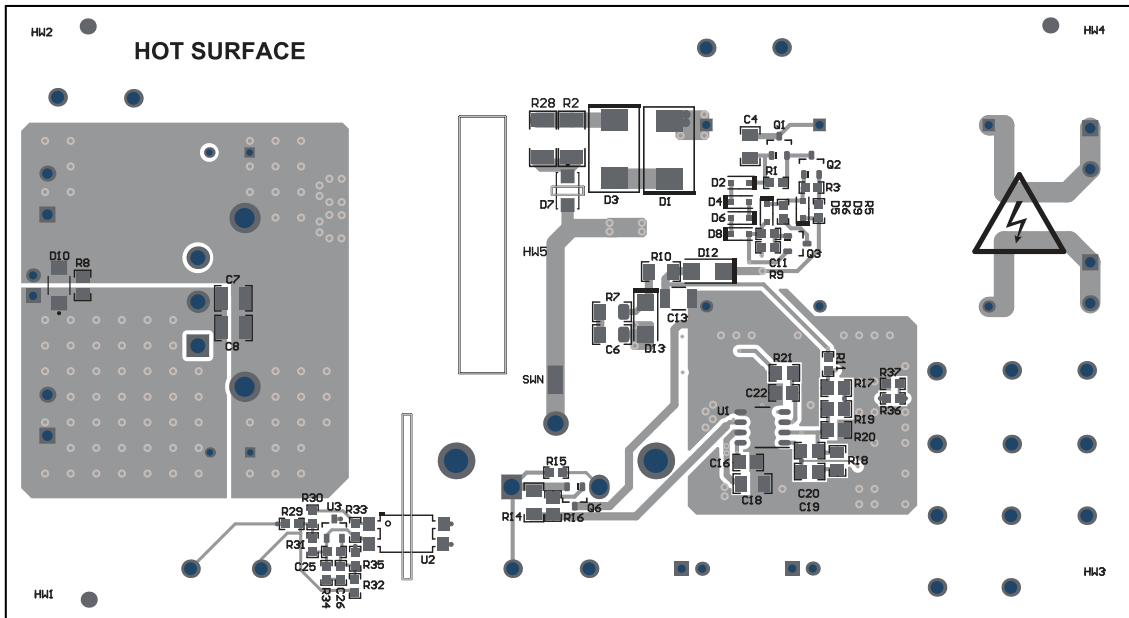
UCC28C56EVM-066, PCB Bottom Layer, Assembly (mirrored view)
